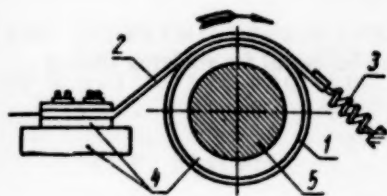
Schematic of the sliding contact. 1) Copper ring; 2) strip copper brush; 3) spring; 4) insulating details; 5) shaft.
